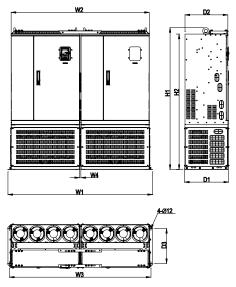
Parallel installation dimension for 380V 560–630kW and 660V 710kW models
